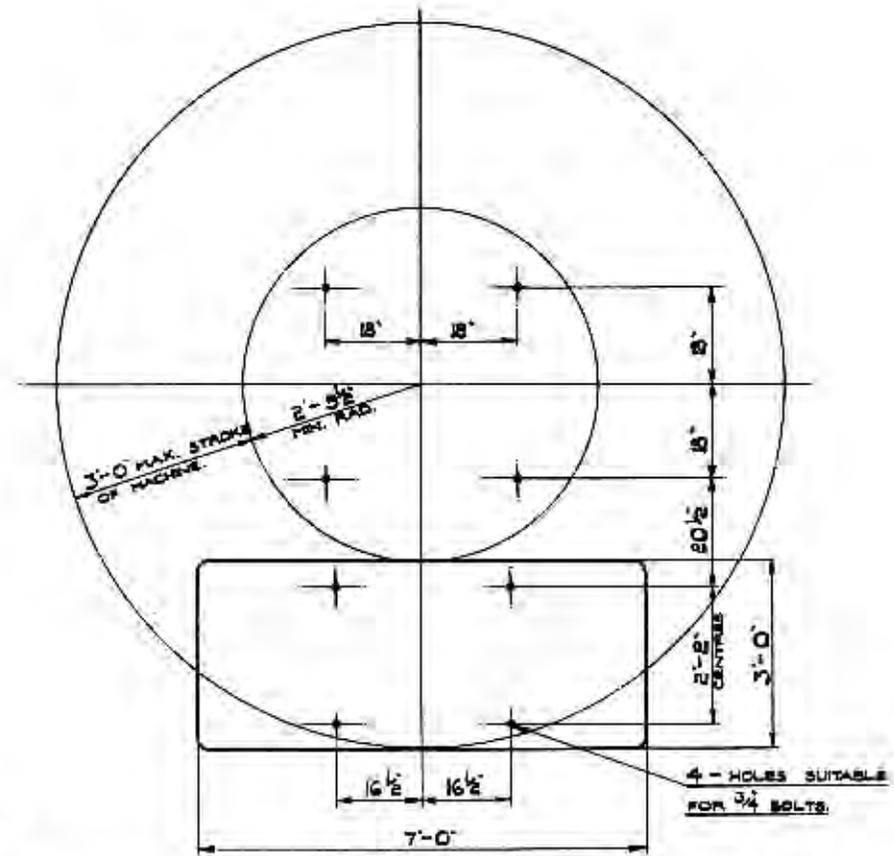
PLAN OF BOLT POSITIONS FOR RISE AND FALL TABLE.
